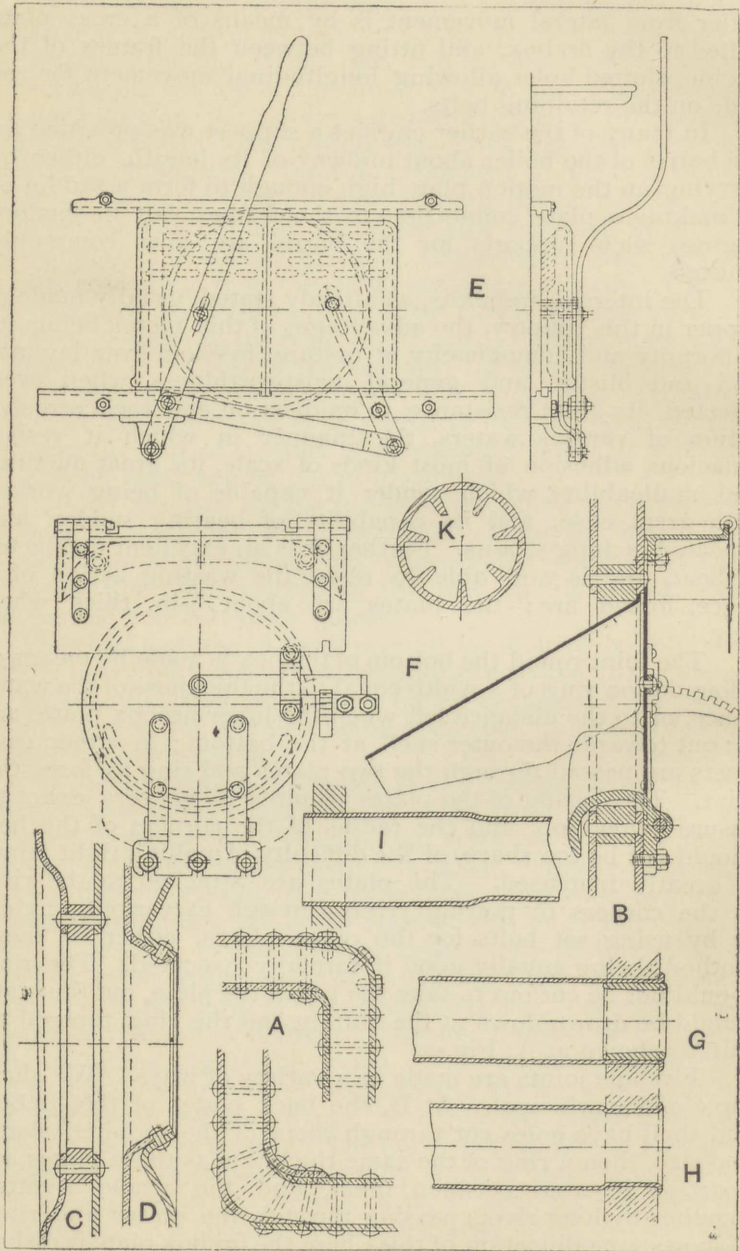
FIRE DOORS, TUBES AND FOUNDATION RING JOINTS.
